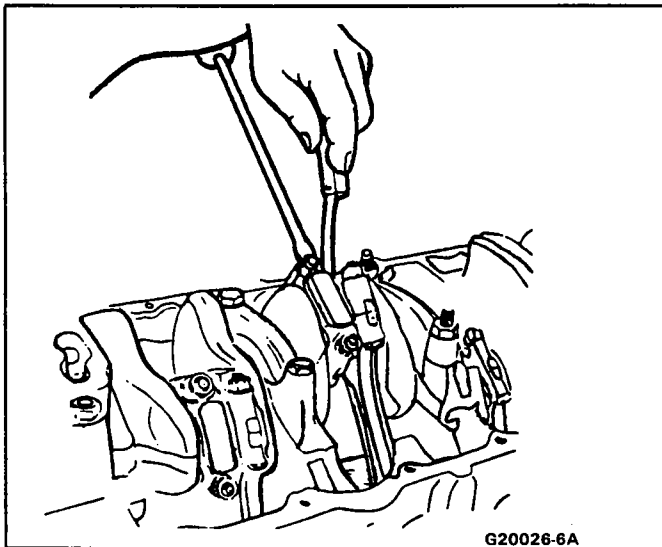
Measuring Connecting Rod Side Clearance (Double Rod Journal)
